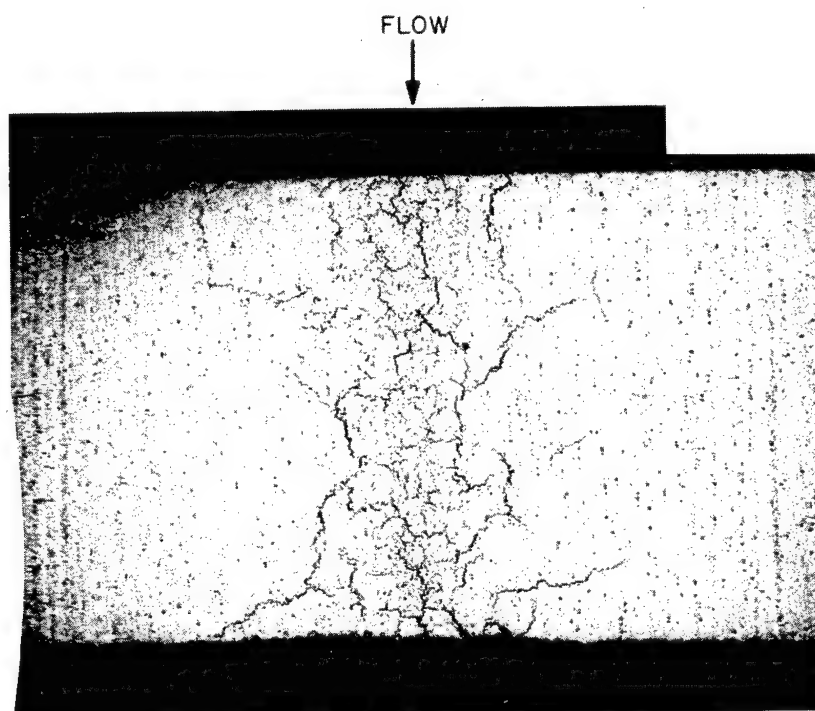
View of plane cut tangent to inside surface of Inconel test section showing orientation of thermal fatigue cracks after exposure at 0.4 cps in a fused-salt environment.
